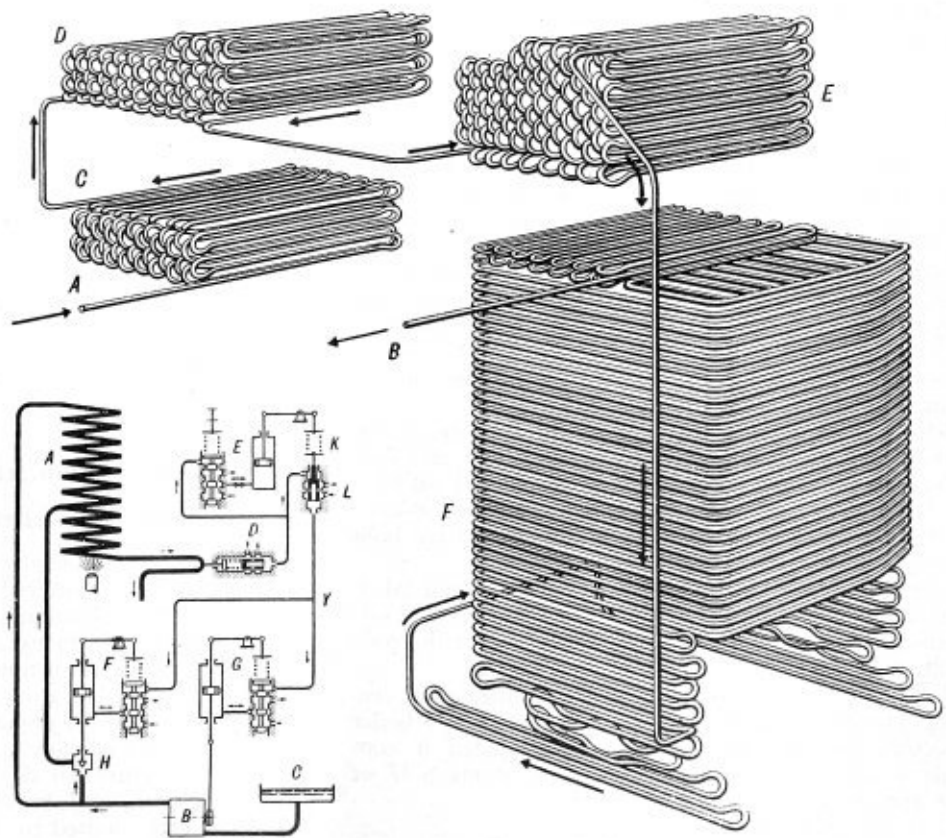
(Lower left) Feed control apparatus shown diagrammatically. Fig. 3.—(Right) Tube arrangement of new single-tube steam generator
